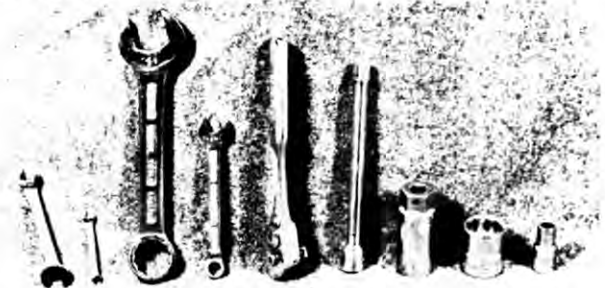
left to right, two open end wrenches in BA sizes, two combination wrenches in Whitworth sizes, ratchet handle, 6 inch ratchet handle extension, spark plug socket, two whitworth sockets.
